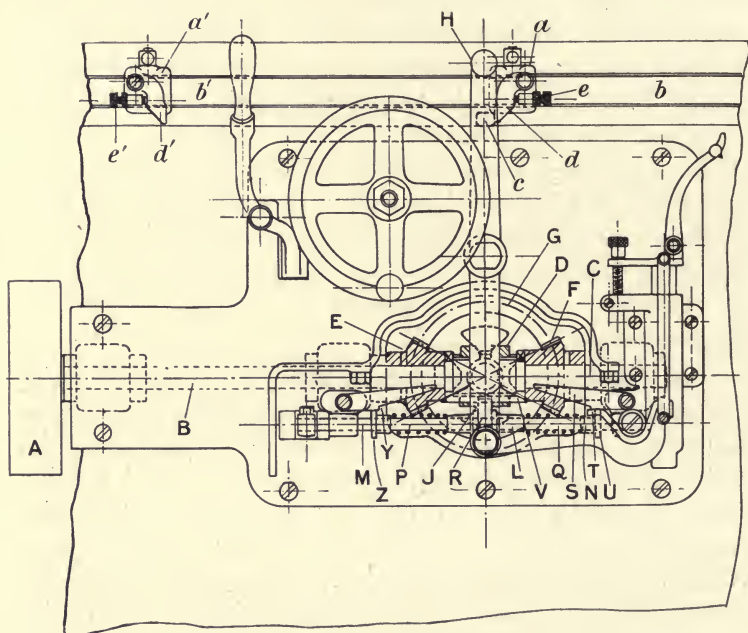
TRIGGER REVERSING MECHANISM—CINCINNATI GRINDER CO.
